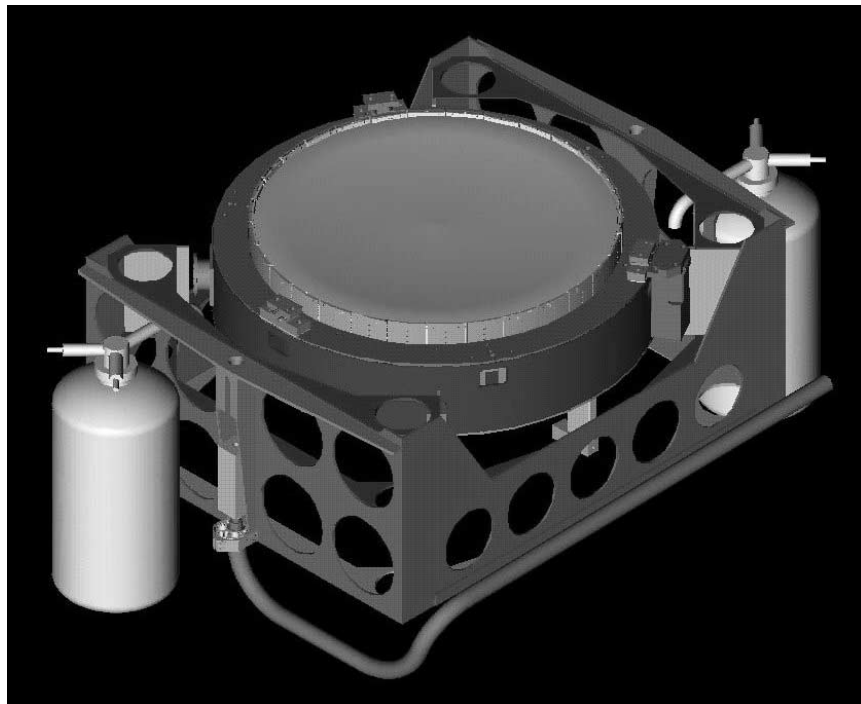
Pro/Engineer drawing of the camera with the front and rear shrouds removed and the saddle assembly as it is mounted relative to the camera. The two 10 liter intermediate supply dewars are shown mounted on the saddle, but the power supplies, which are mounted on the saddle faces adjacent to the dewars, are not shown here. Also shown is the umbilicus, the kinematic mounts, and one of the pneumatic latches (left center), which hold the camera to the telescope.
